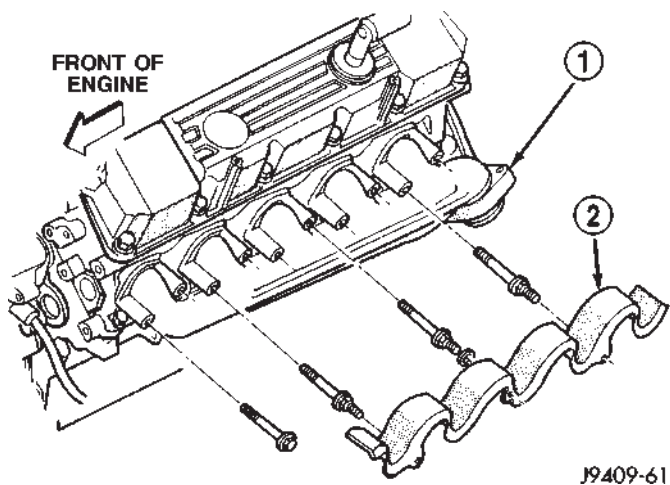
Spark Plug Wire Heat Shields (Left Side Shown)
